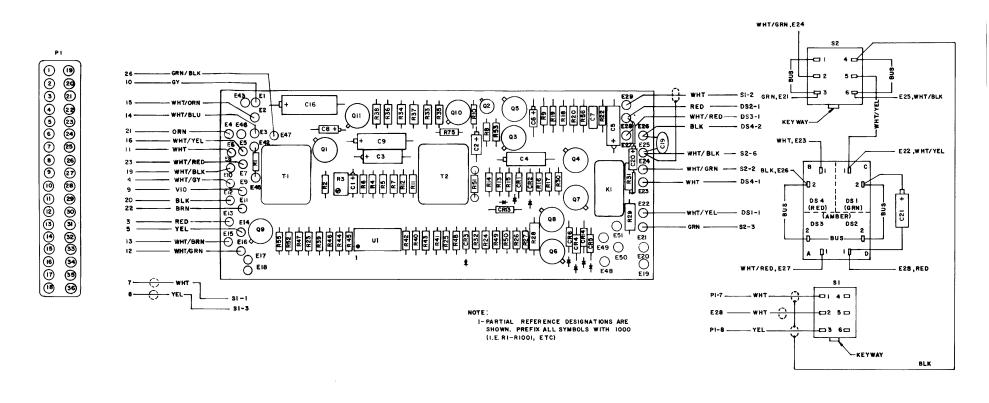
Selector Module Board Assembly and Wiring Diagram
